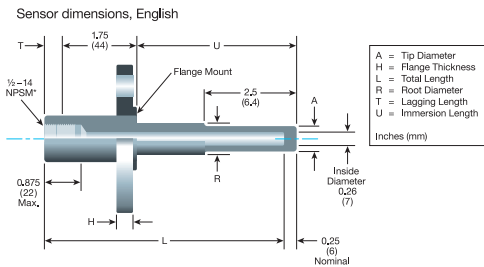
Typical Thermowell Dimensional drawing (English)
